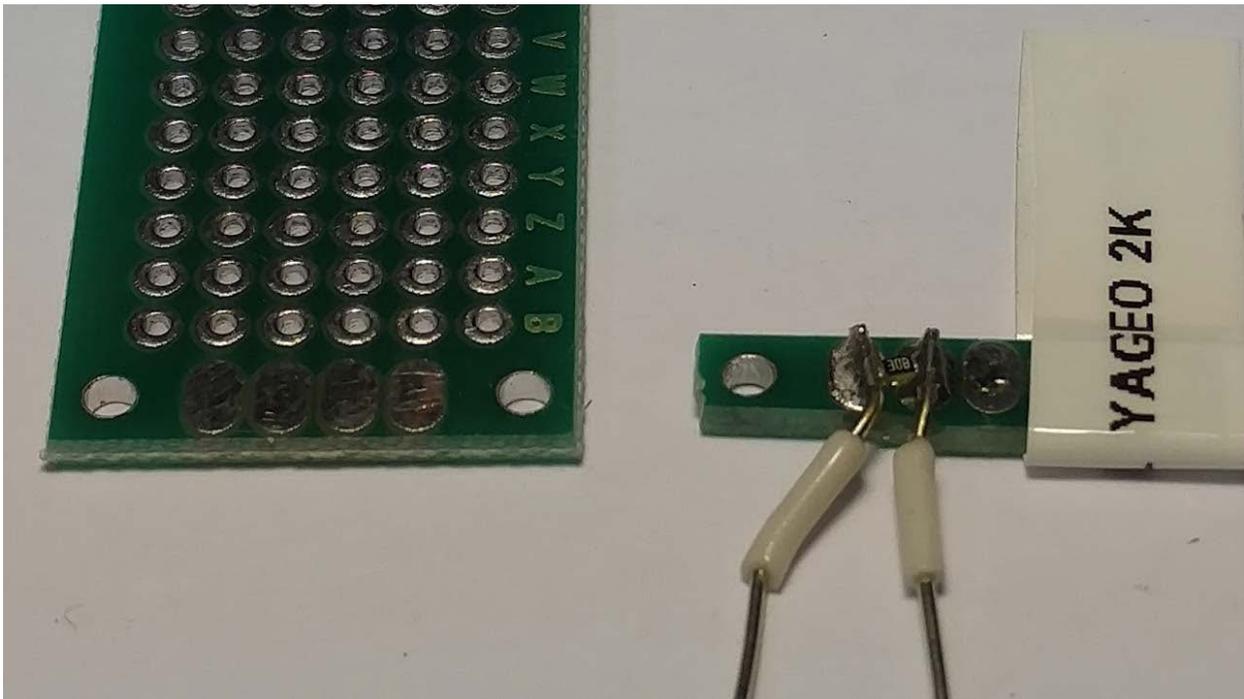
Single resistor holder (on right) made from proto PCB (on left)
